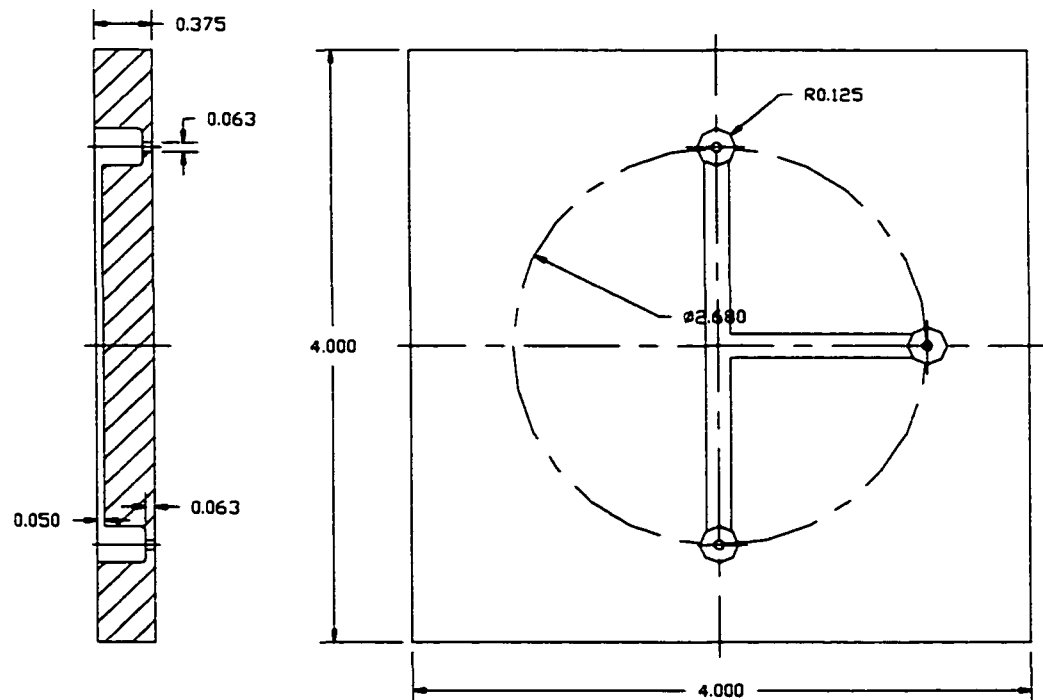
Design of front block showing T-shaped runner used in injection molding test
